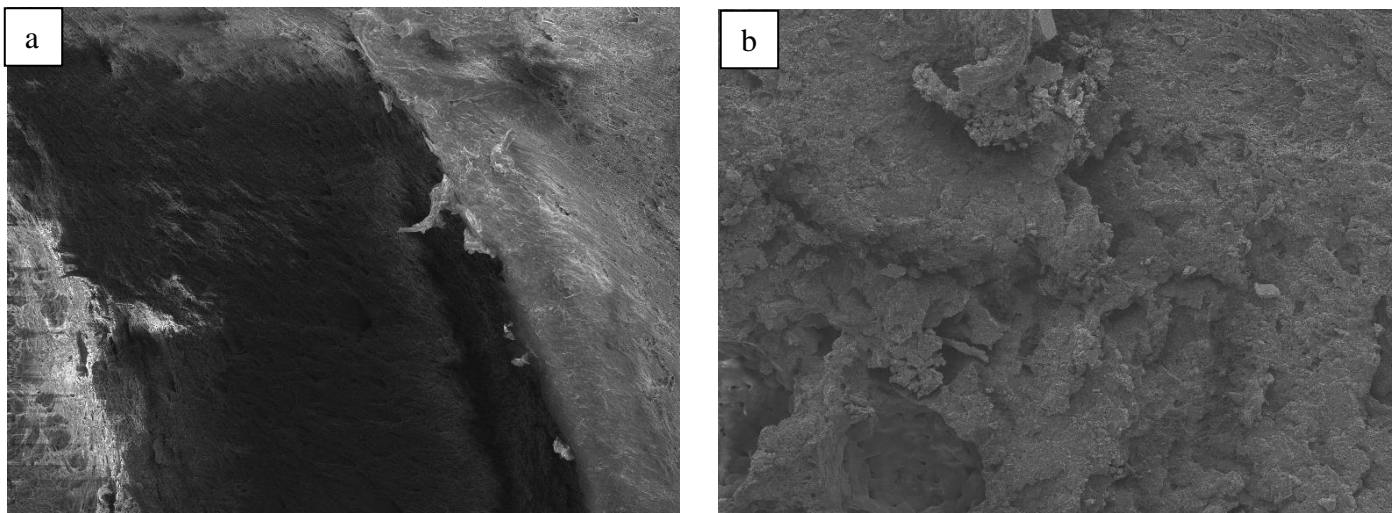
SEM of laser weld seam surface of natural polypropylene with carbon black induced polypropylene welded specimens (a) Fourth specimen transparent part (b) Fifth specimen opaque part
